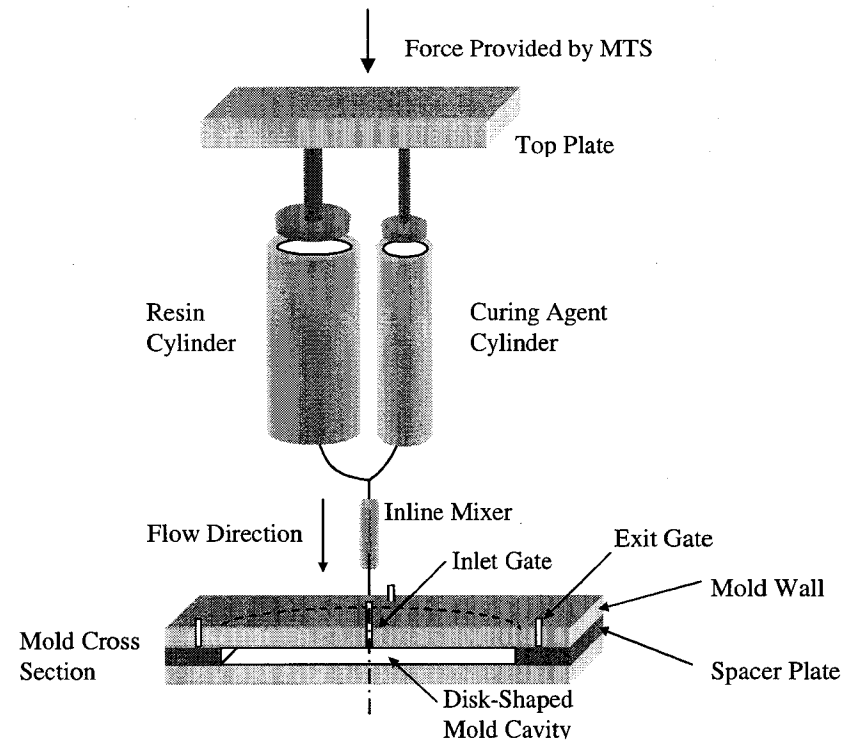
Experimental setup used to fabricate resin transfer molded disks
